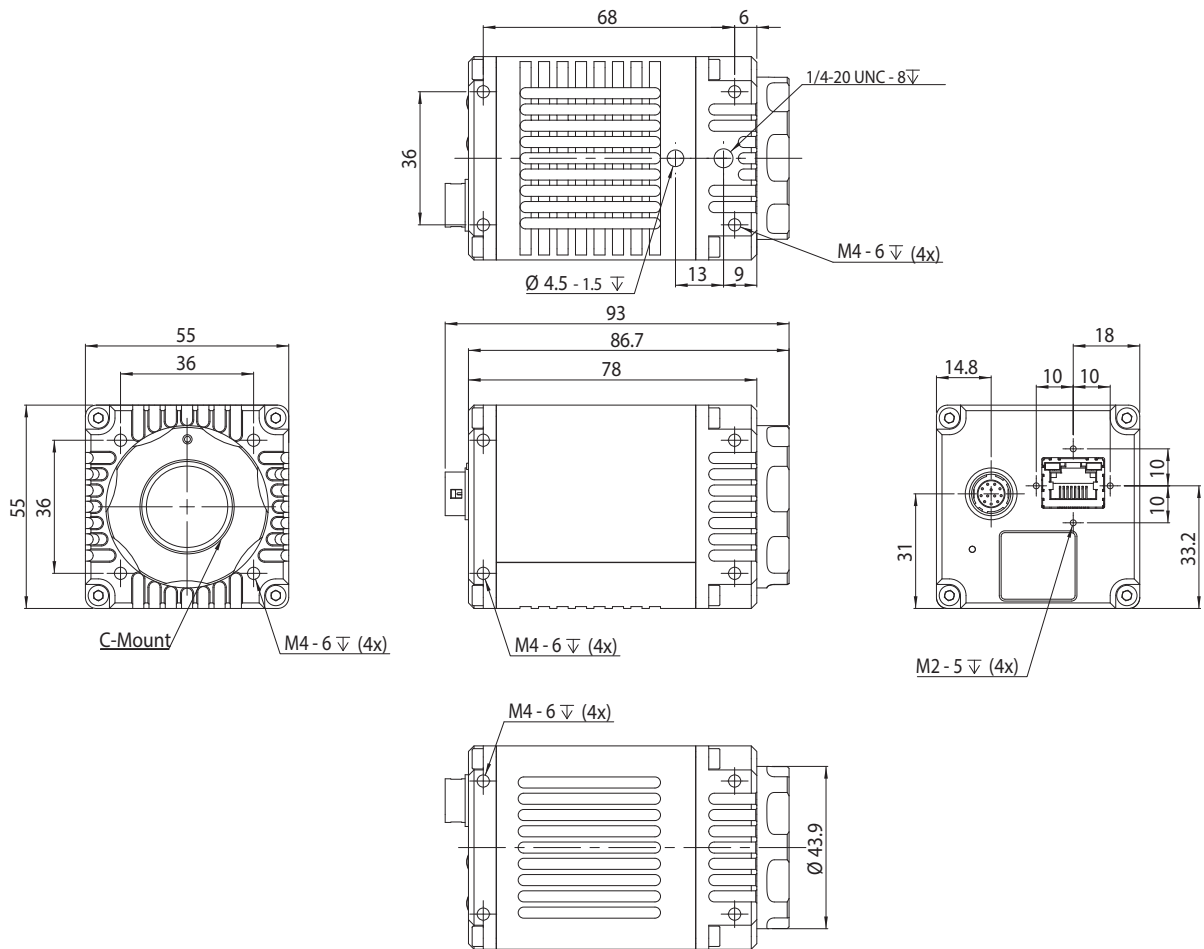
Dimensions Goldeye G-032 SWIR with C-Mount lens adapter
